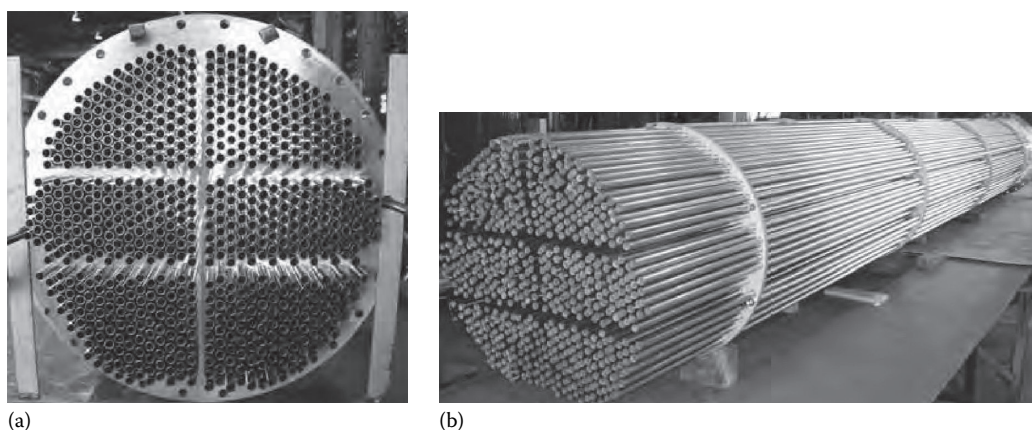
Tube bundle assembly. (a) Insertion of straight tubes through tubesheet and (b) tube bundle ready for insertion into the shell. (Photo courtesy of Mueller, Springfield, MO.)
